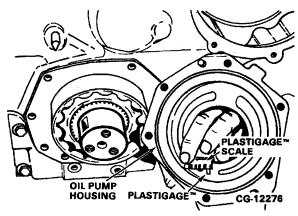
Check Housing to Rotor Clearance (Method Two)
